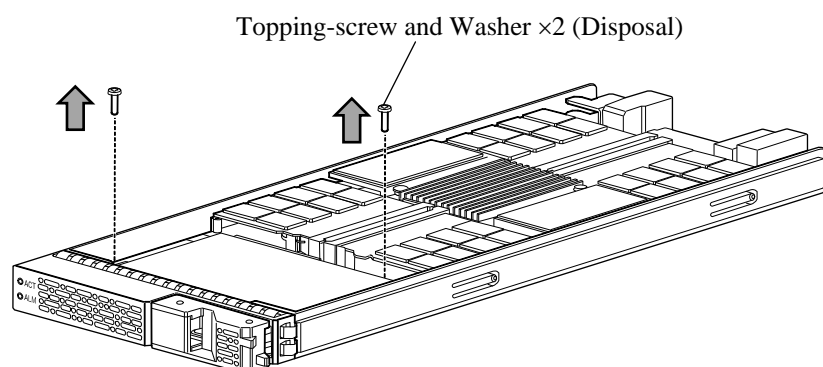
Removing Tapping-screws and Washers
